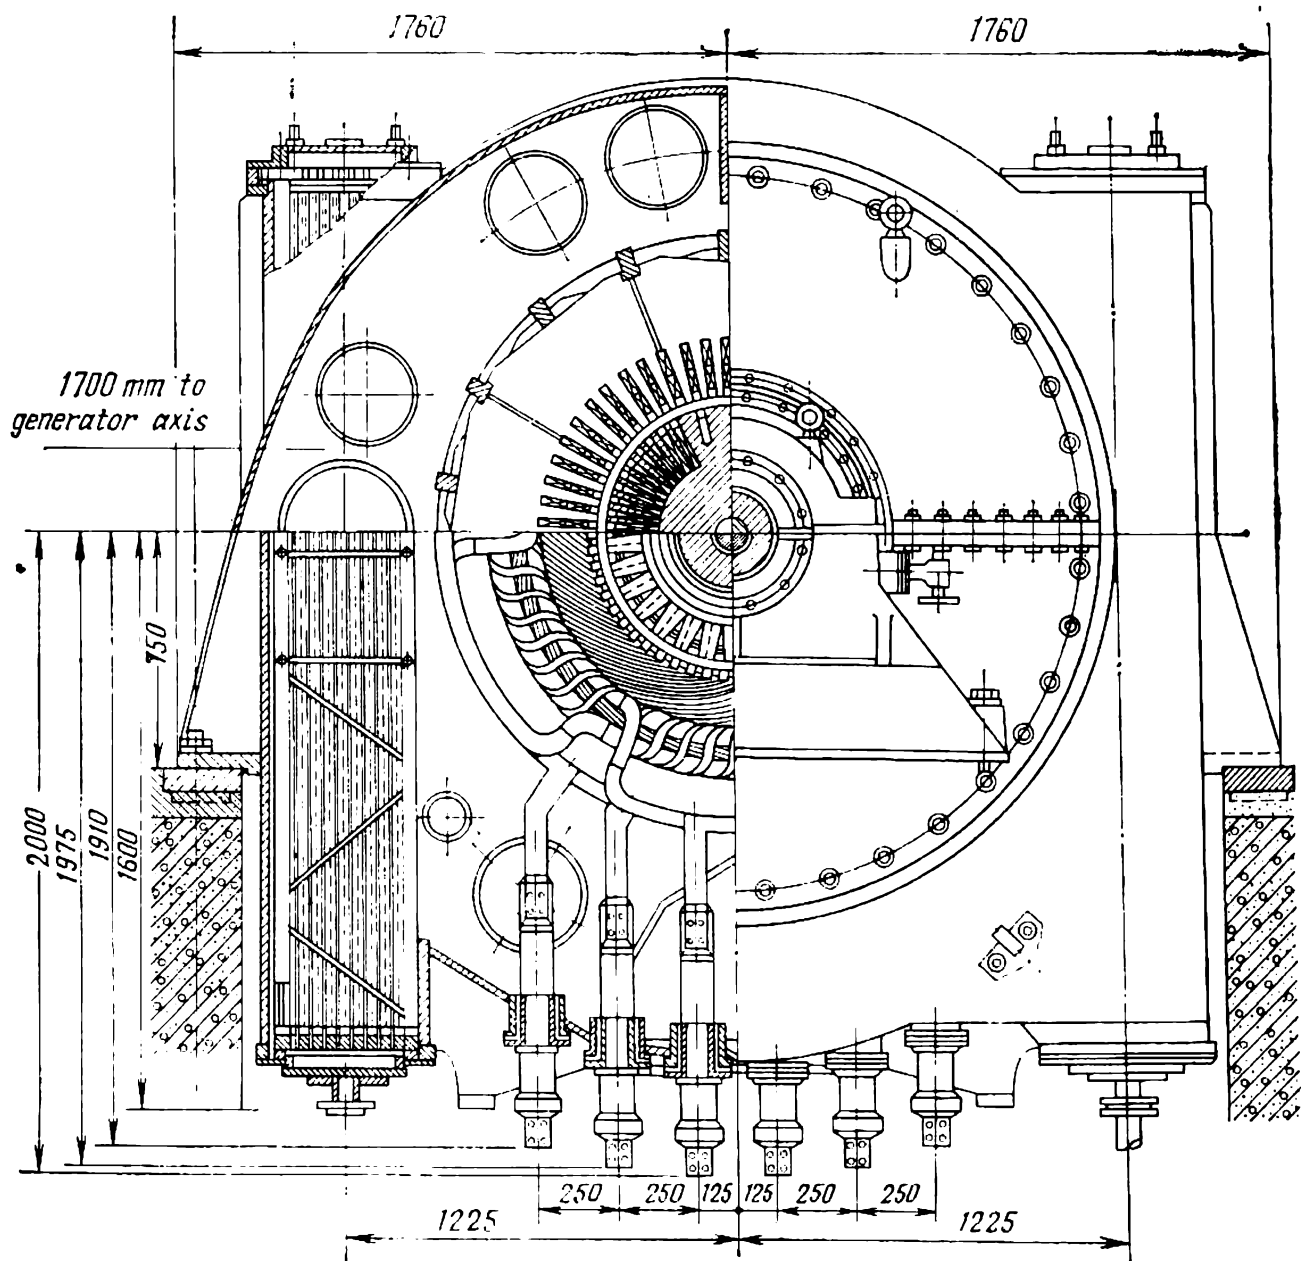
Sectional view of a 30-MW, 3000-rpm, turbogenerator using indirect hydrogen cooling (all dimensions in mm)
